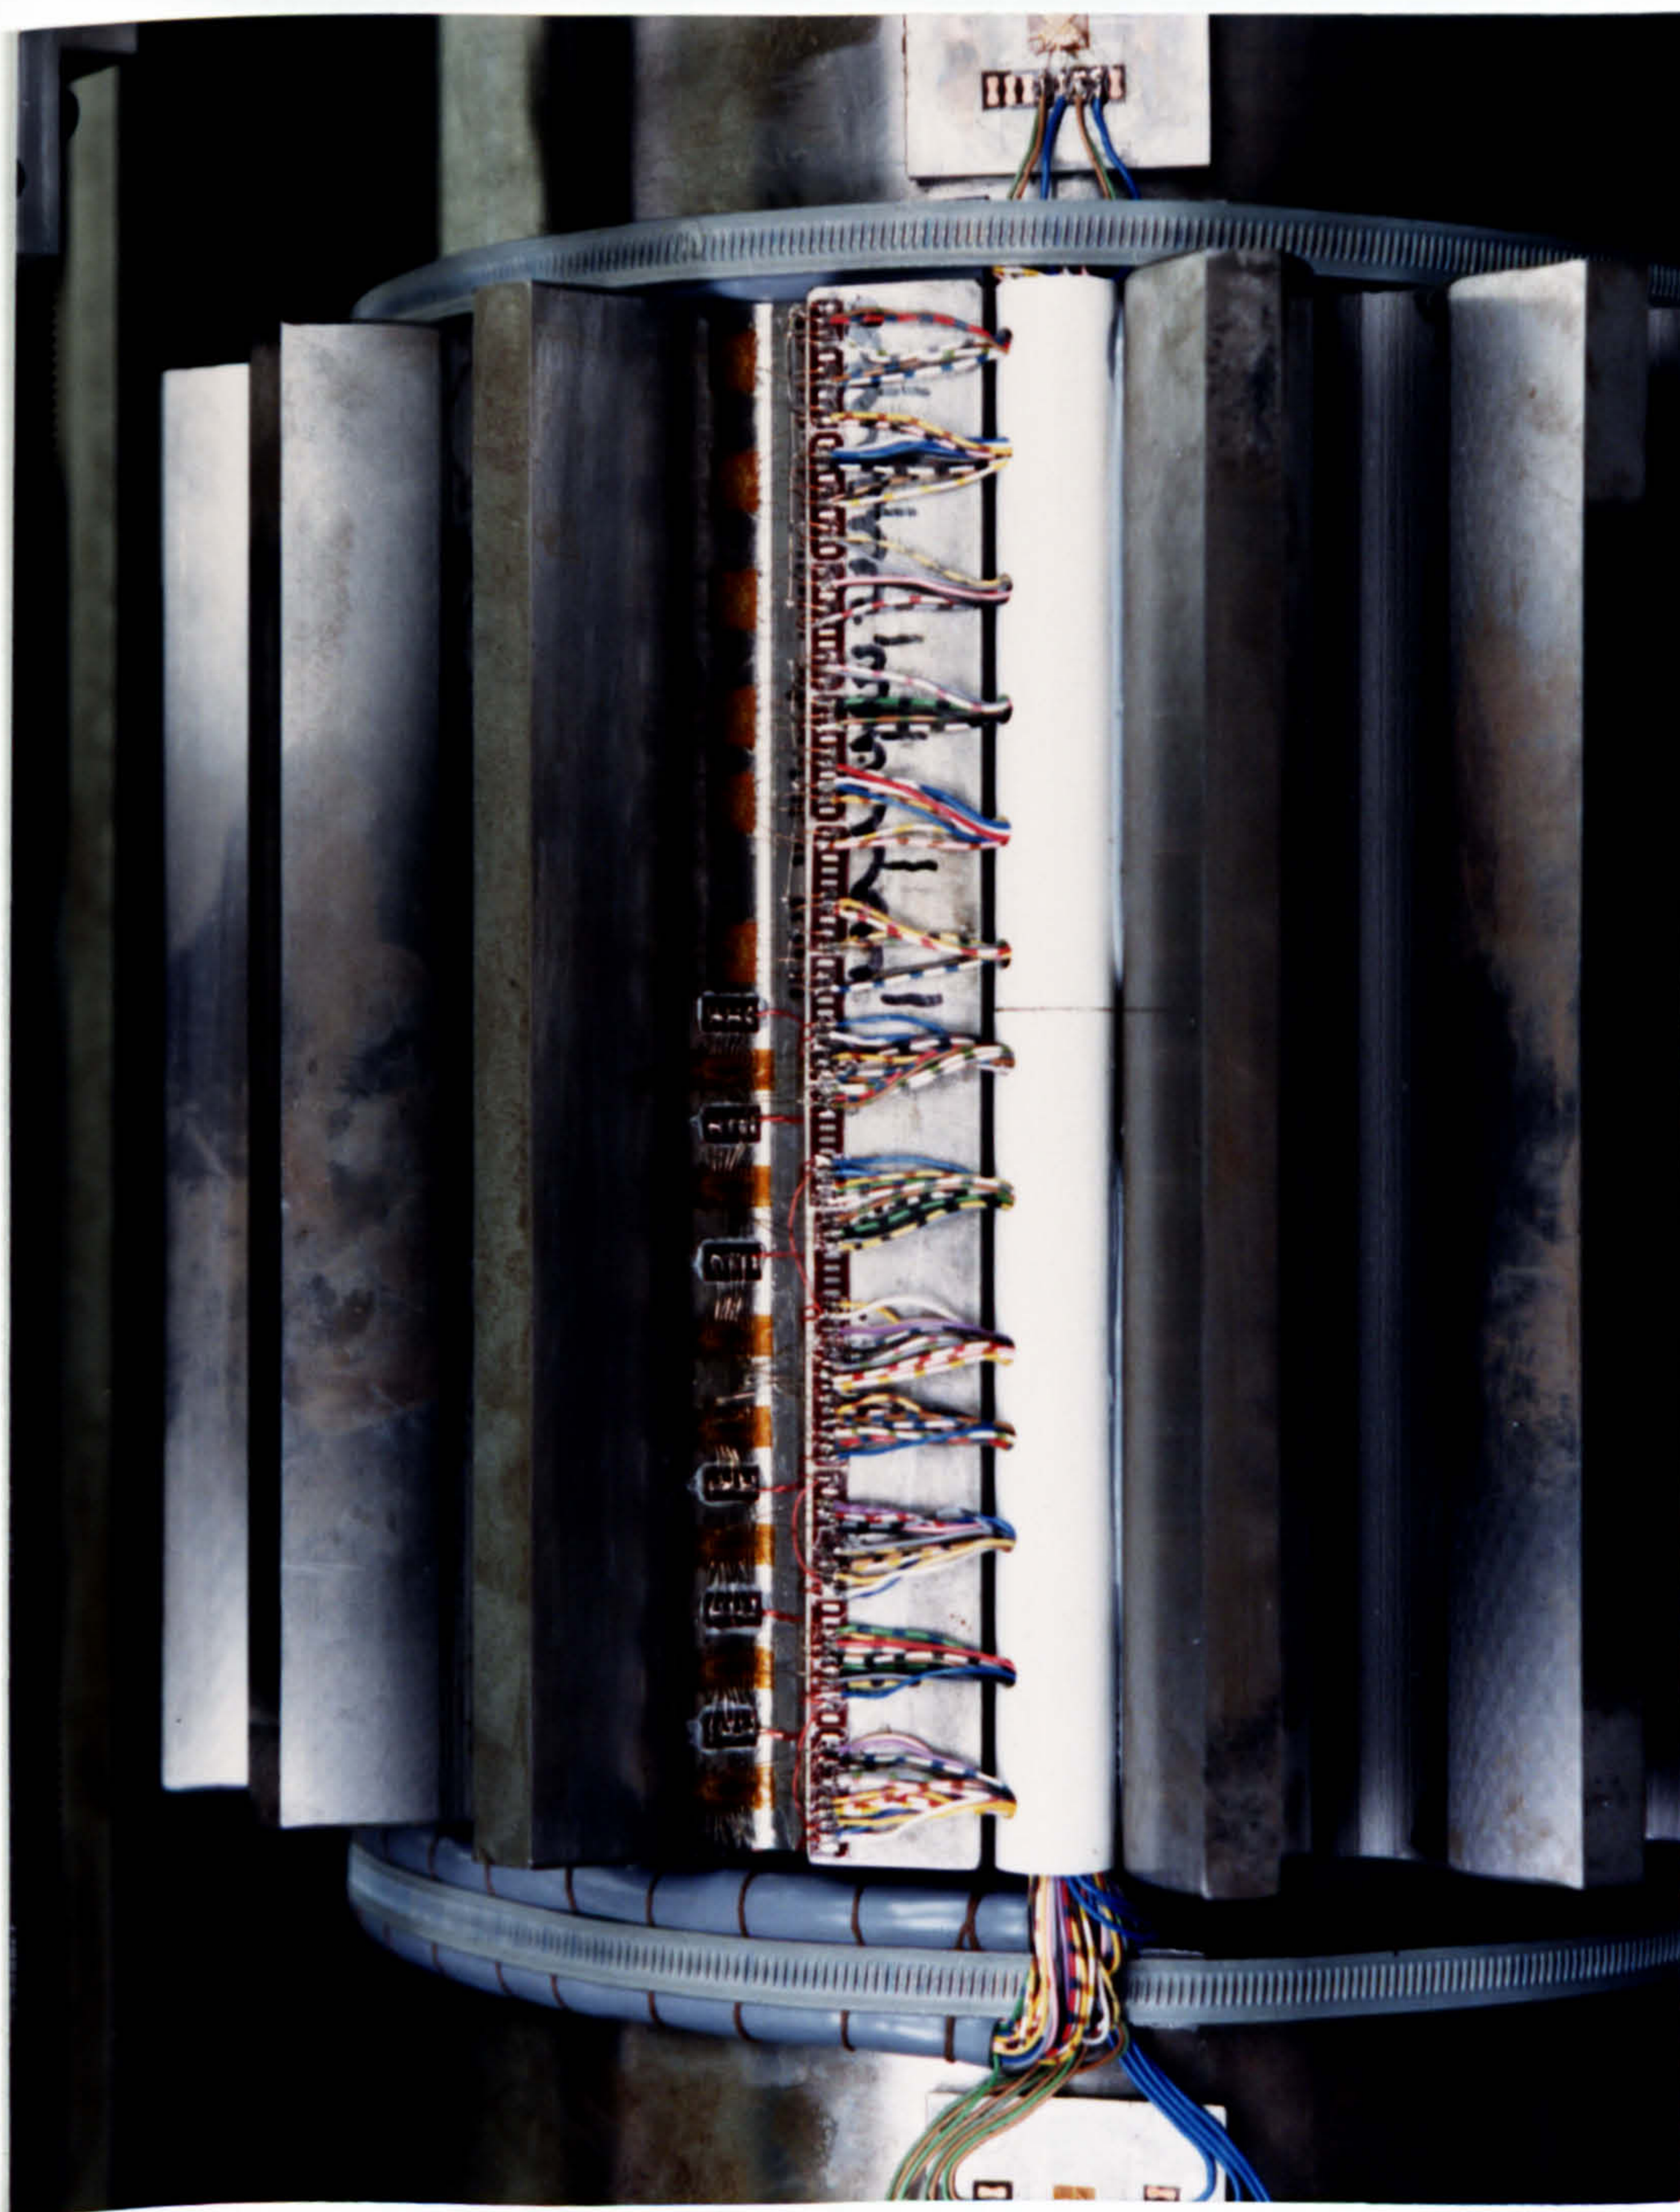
Strain Gauging of Tensile Tooth Root
